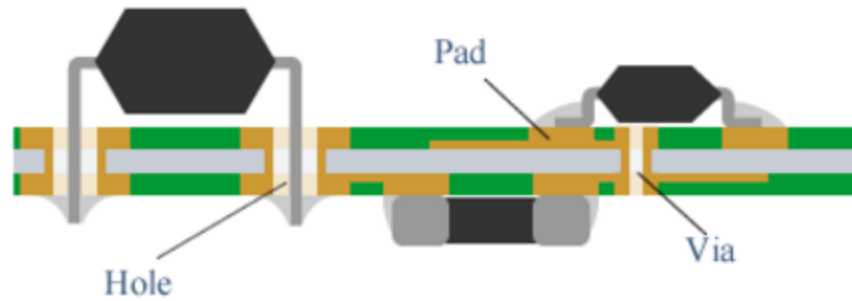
Illustration of cross section of PCB with vias and through-hole
